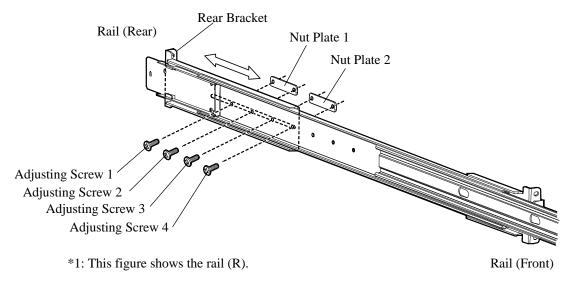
Installing the Nut Plate by Adjusting the Rack Rail Length
